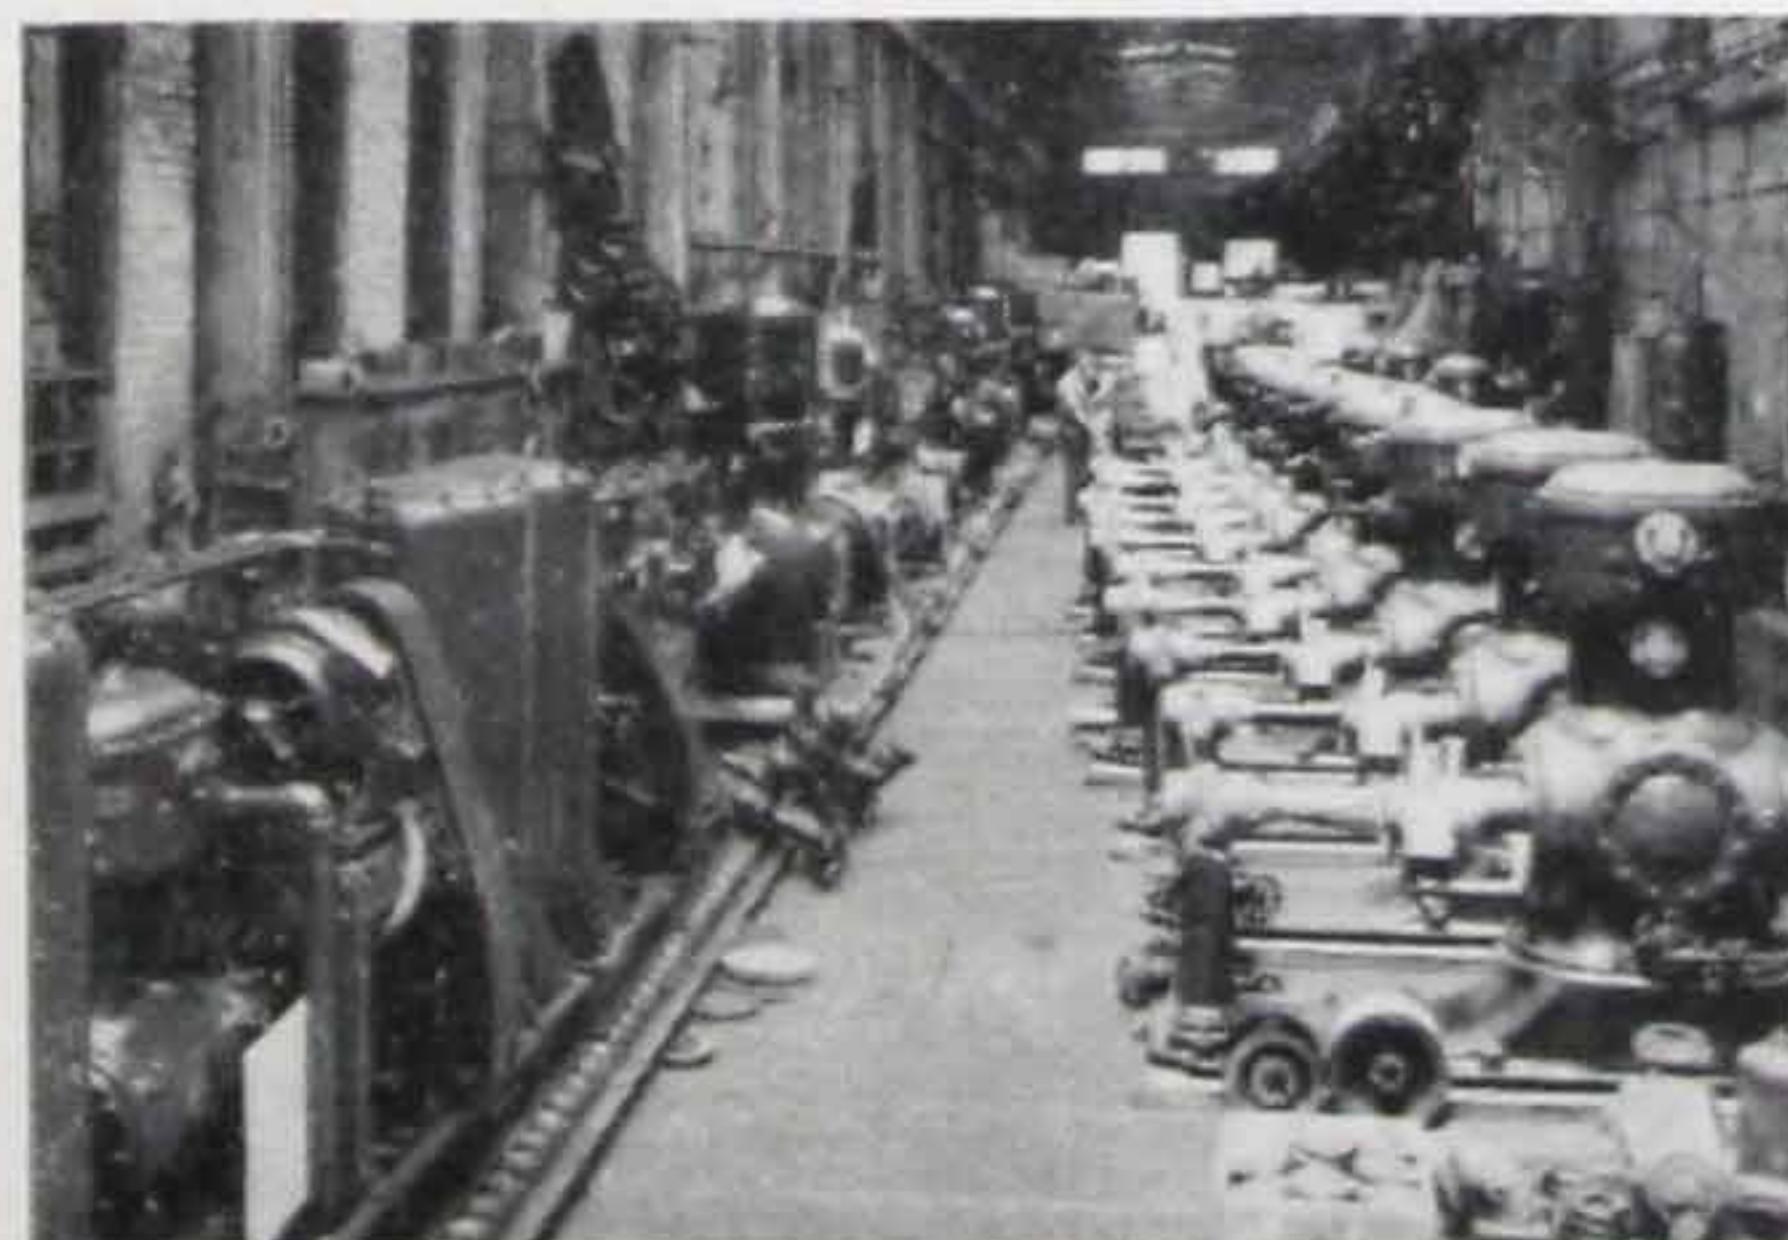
Assembly Floor of the Waynesboro Shops, Showing Machines of Various Types.
